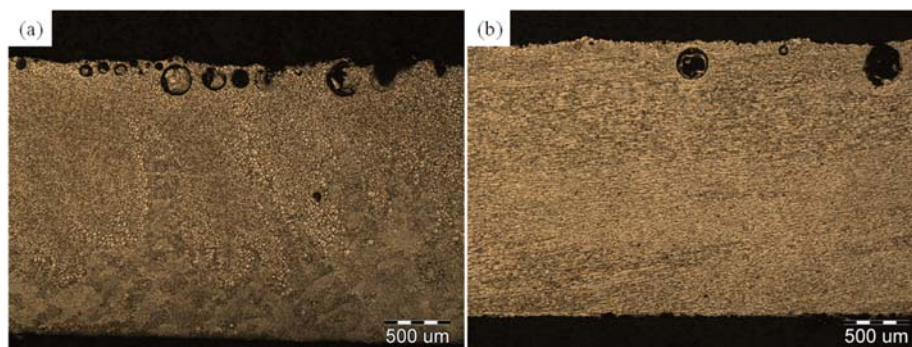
Pore distribution in longitudinal section of weld at different welding speeds: (a) 200 mm/min, (b) 100 mm/min.
